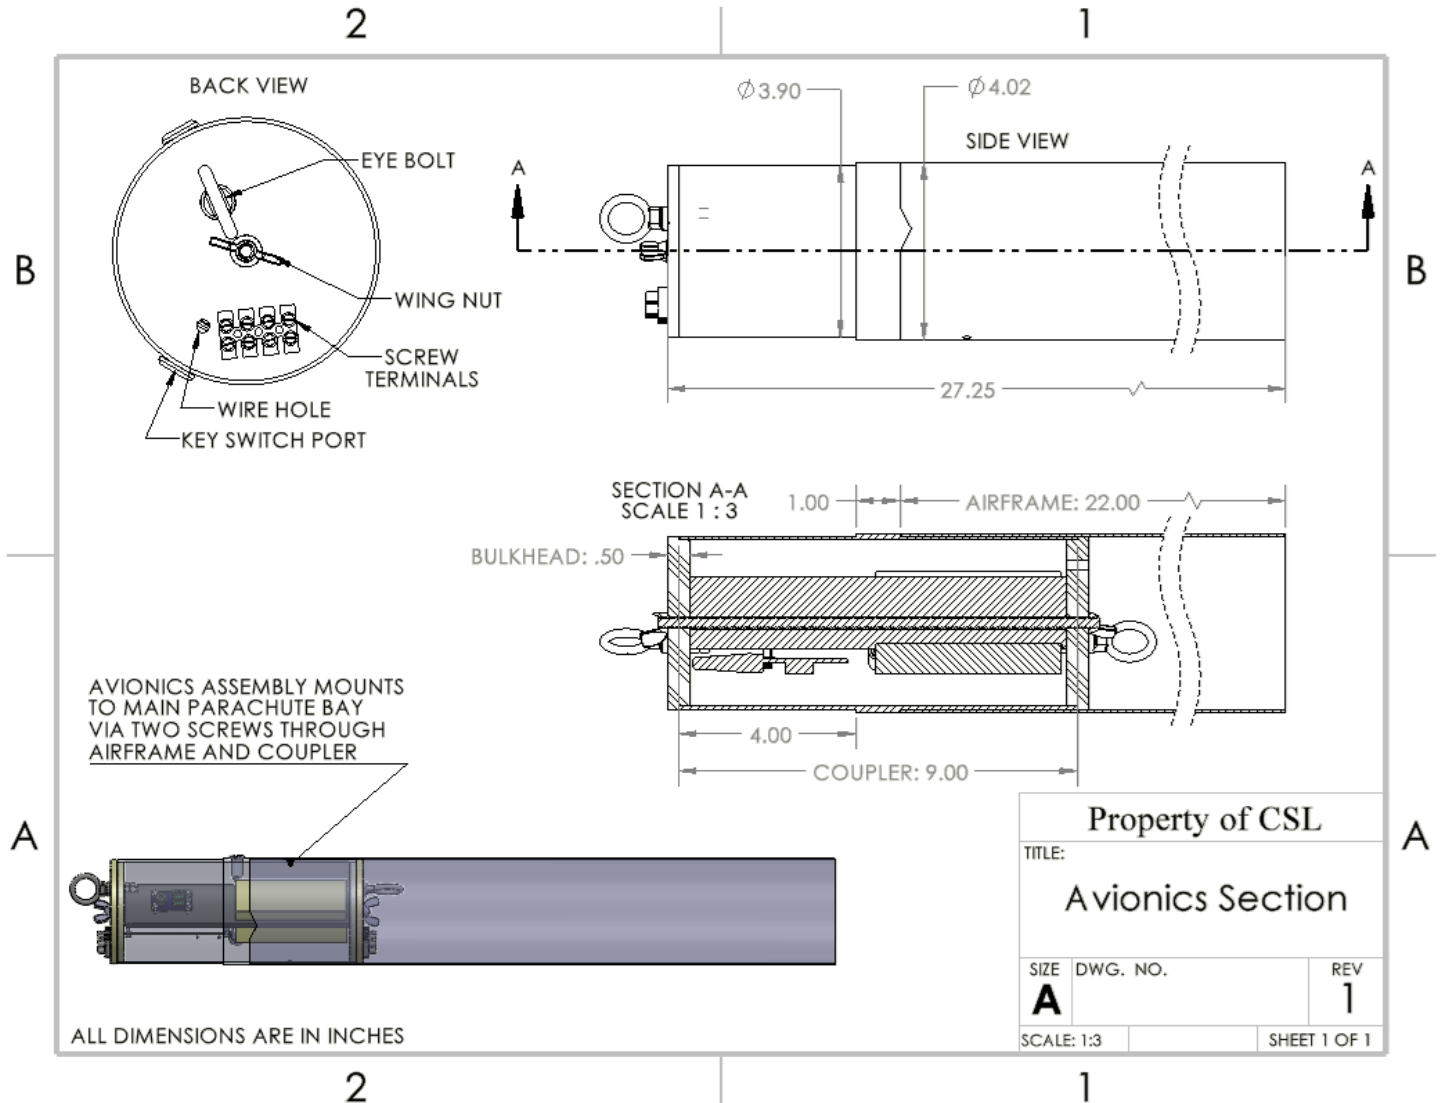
Dimensioned CAD schematic of the avionics section. Fasteners are removed for clarity. Note that the main parachute bay is truncated in this drawing.
